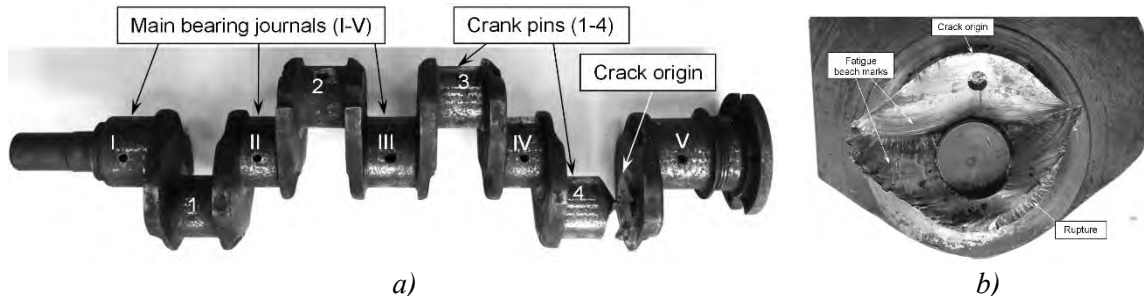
View of the crankshaft after failure (a) and fracture of the crankshaft (b).
